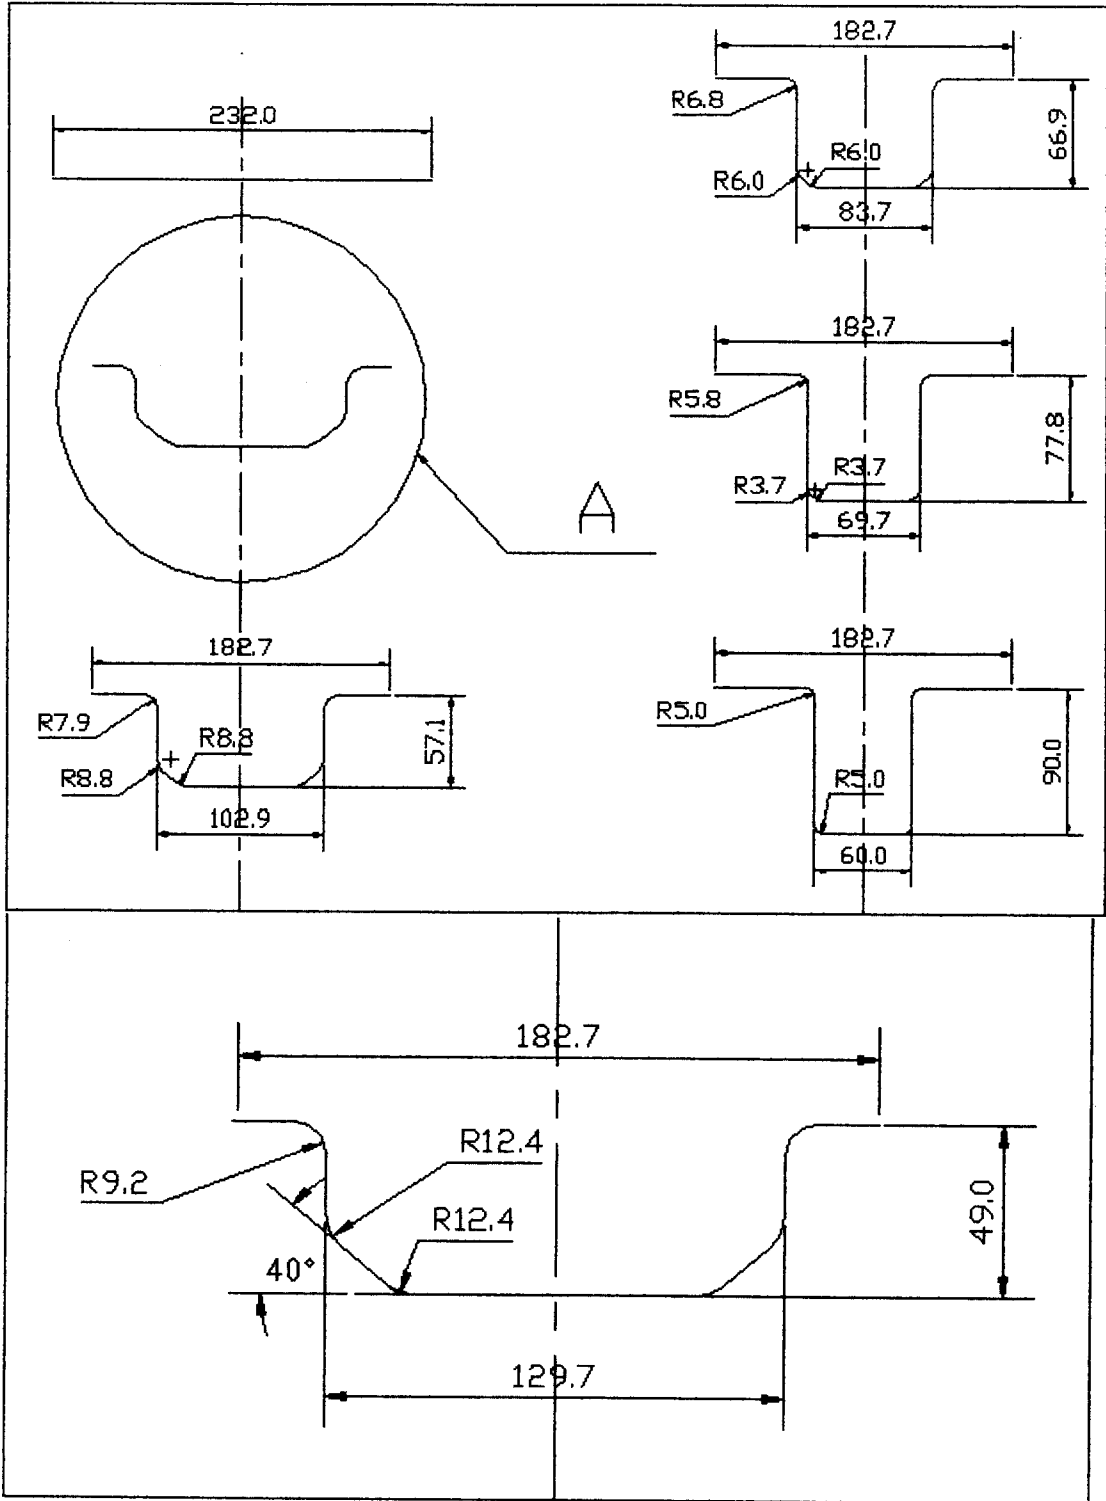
Deep Drawing Process with Tapered Punch(T=1 mm)
